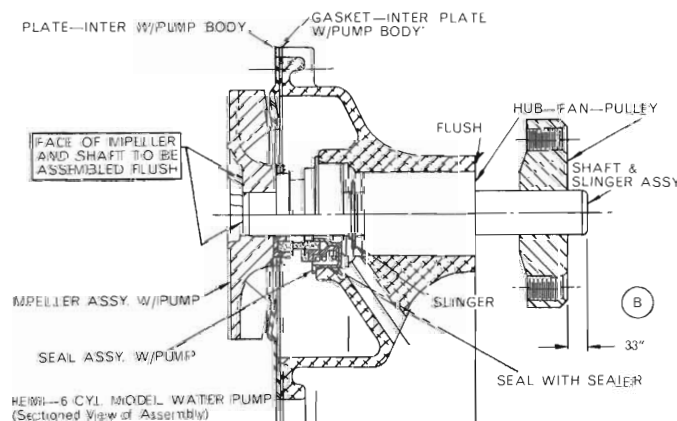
Hemi 6 Cyl. Early Type Impellor Water Pump Assembly (sectioned view)
